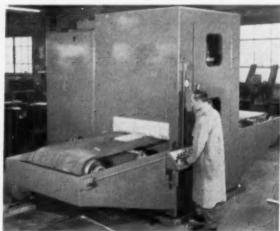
A conveyerized machine which uses the contact roll for sanding
